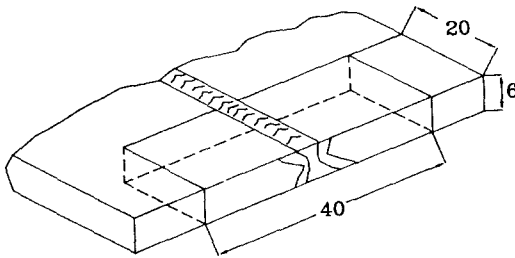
Welding plate configuration and extraction of specimen(mm).
